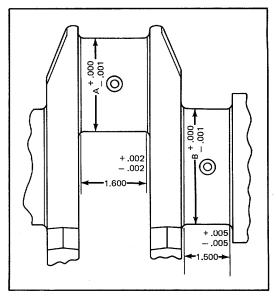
Dimensions of Crankshaft Journals - In-Line Engine
